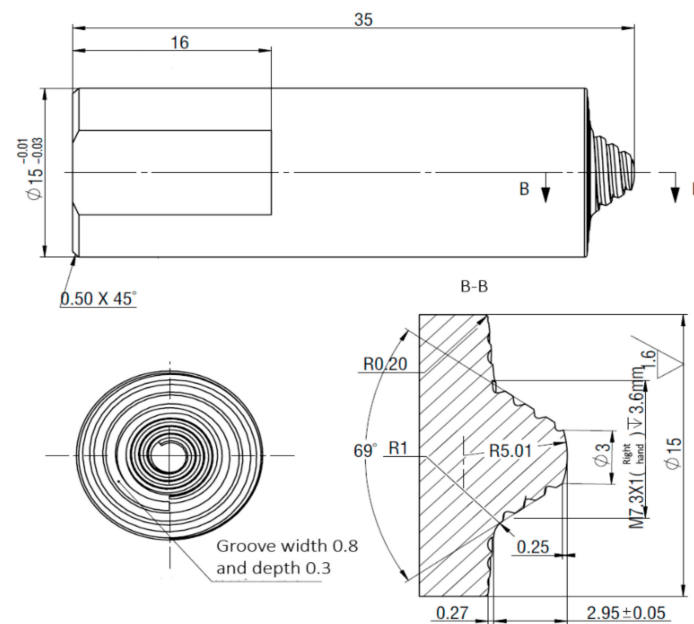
Geometric dimensions of the experimental friction stir welding (FSW) tool.
